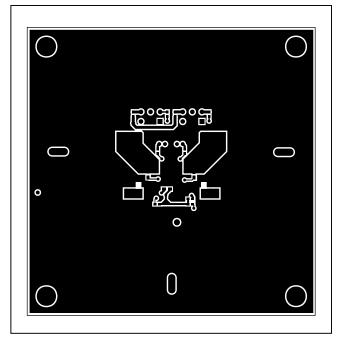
MAX17509 EV Kit PCB Layout—Solder Side
